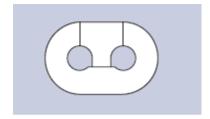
Connecting link C type (Source: Vryhof Anchors)
